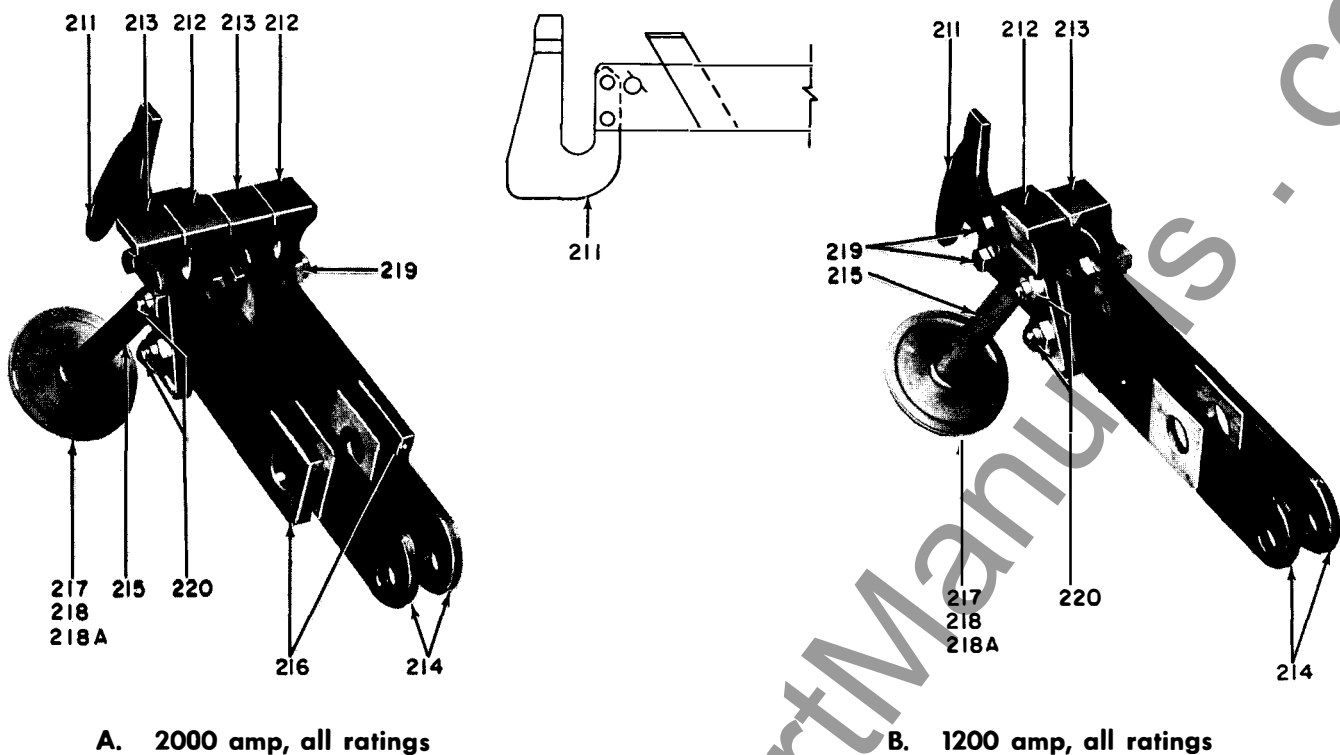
Movable contact arm assembly (Ref. No. 210)
